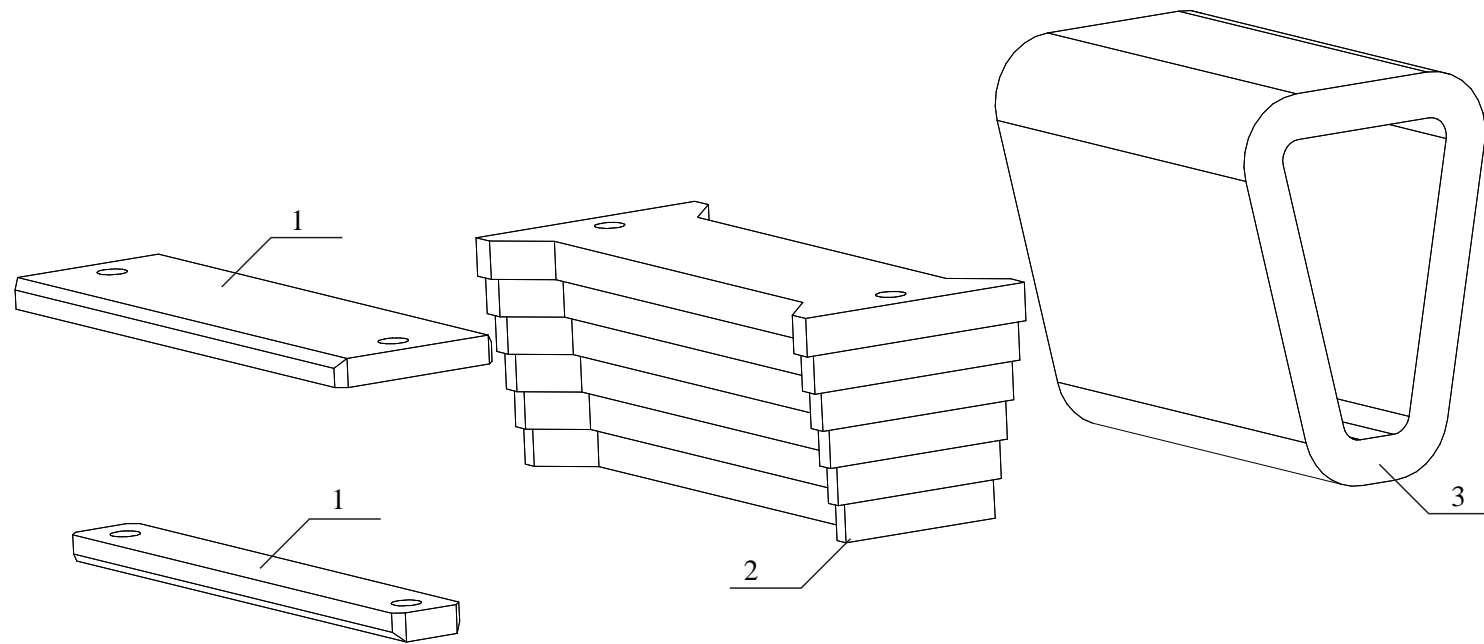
Exploded view of a preassembled stator core element. Mechanical bracket (1), stator core element (2), tooth coil winding (3).
